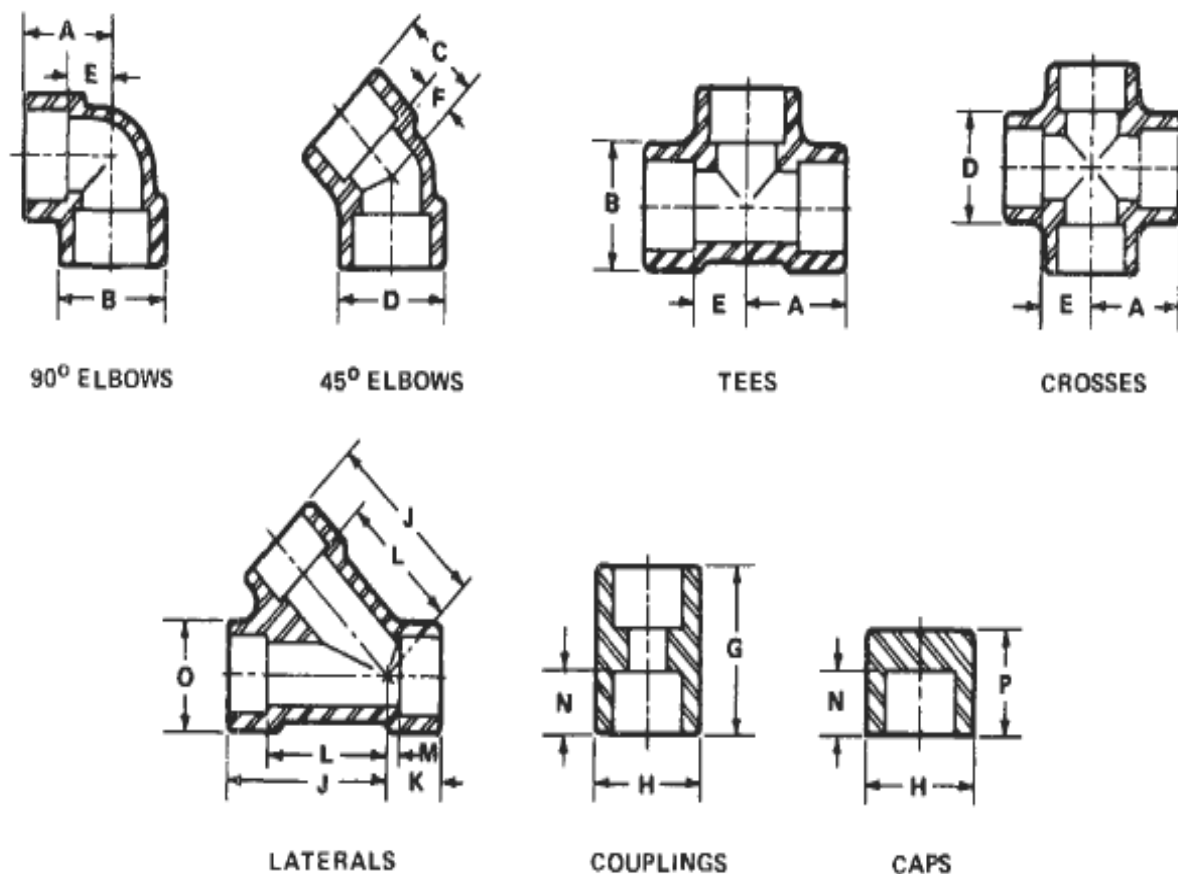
B. Forged steel socket weld fittings, WOG (water, oil or gas service). Note: the working pressures are always well above actual plant operating levels and are heavy to allow for welding. Pressure classes 3000 psi and 6000 psi, sizes ½ in. through 4 in. nominal. Do not weld on malleable iron or cast iron fittings. (By permission, Ladish Co., Inc.)
